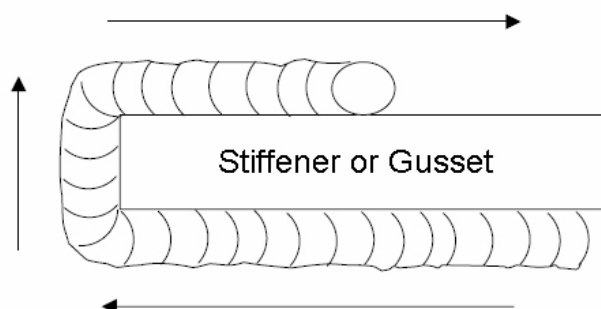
Wrapping a weld around a Stiffener or Gusset
